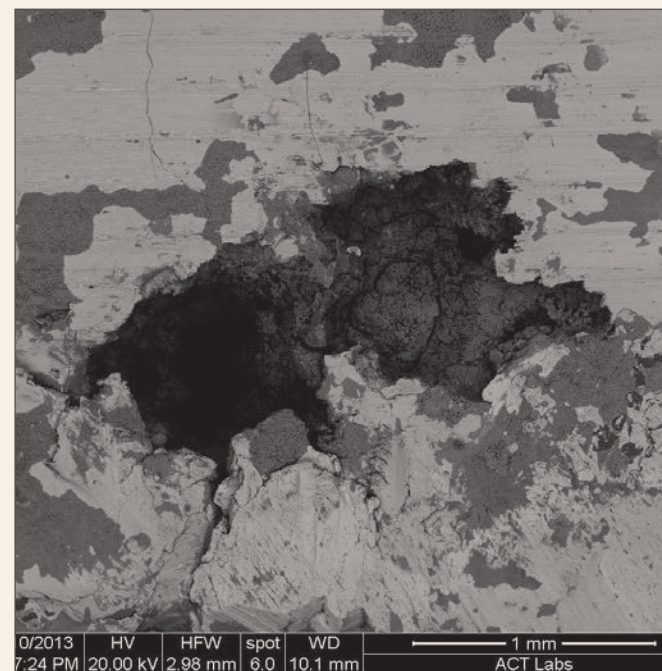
Surface cracks appear to originate at the corrosion pits on the outer surface of the wear ring
